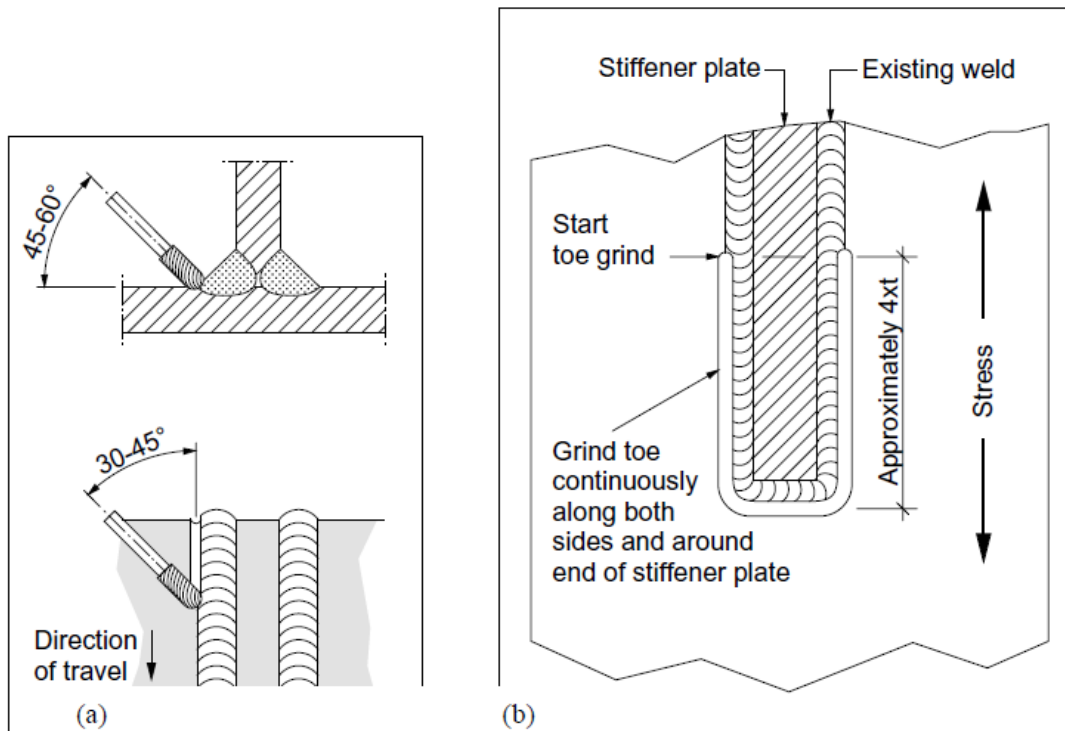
The weld toe burr grinding technique (IIW recommendations, 2002).
